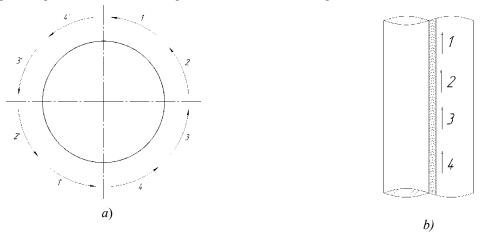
Diagram of implementation of: circular welds (a), longitudinal welds (b)
